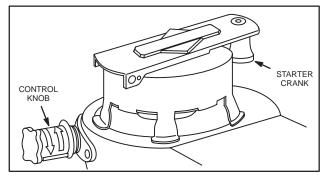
OLD STYLE STARTER ASSEMBLY
